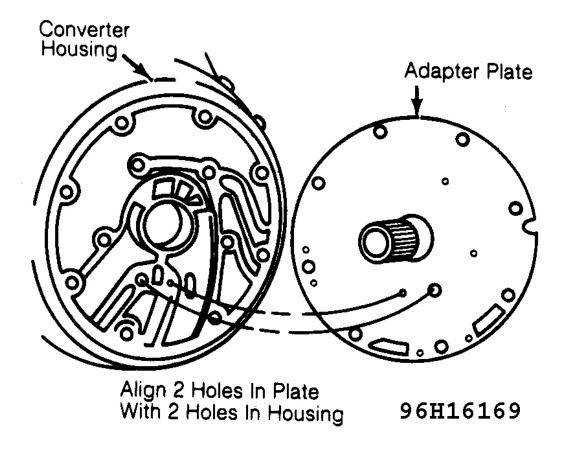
Correct Positioning of Adapter Plate on Housing Courtesy of FORD MOTOR CO.
